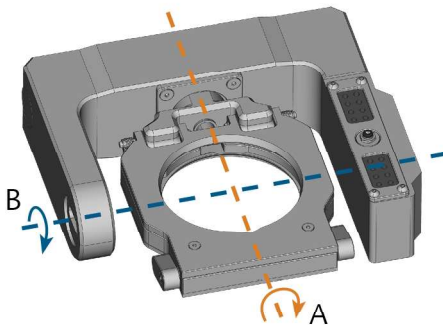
PROGRAMILL DRY: ROTATIONAL AXES
